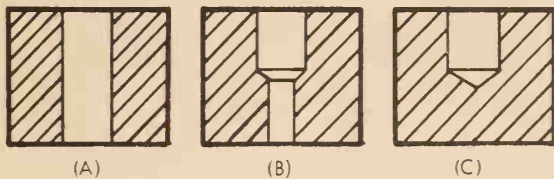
Kinds of holes to be threaded. (A) Open hole; (B) Partly open hole; (C) Closed hole.
